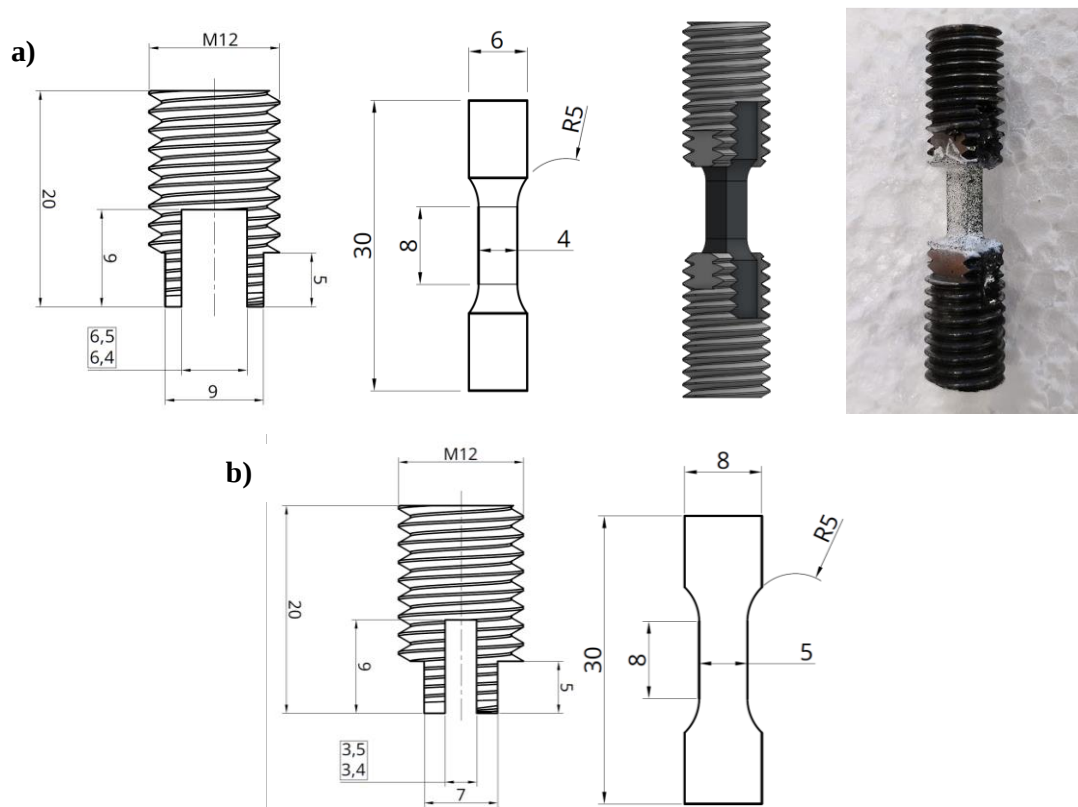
Cross-ply specimen and end cap design for dynamic loading: (a) IM7/8552 specimens from the 10 mm initial plate thickness used in this study; (b) simpler specimen successfully tested for a 3 mm plate with only in-plane dog-bone.
